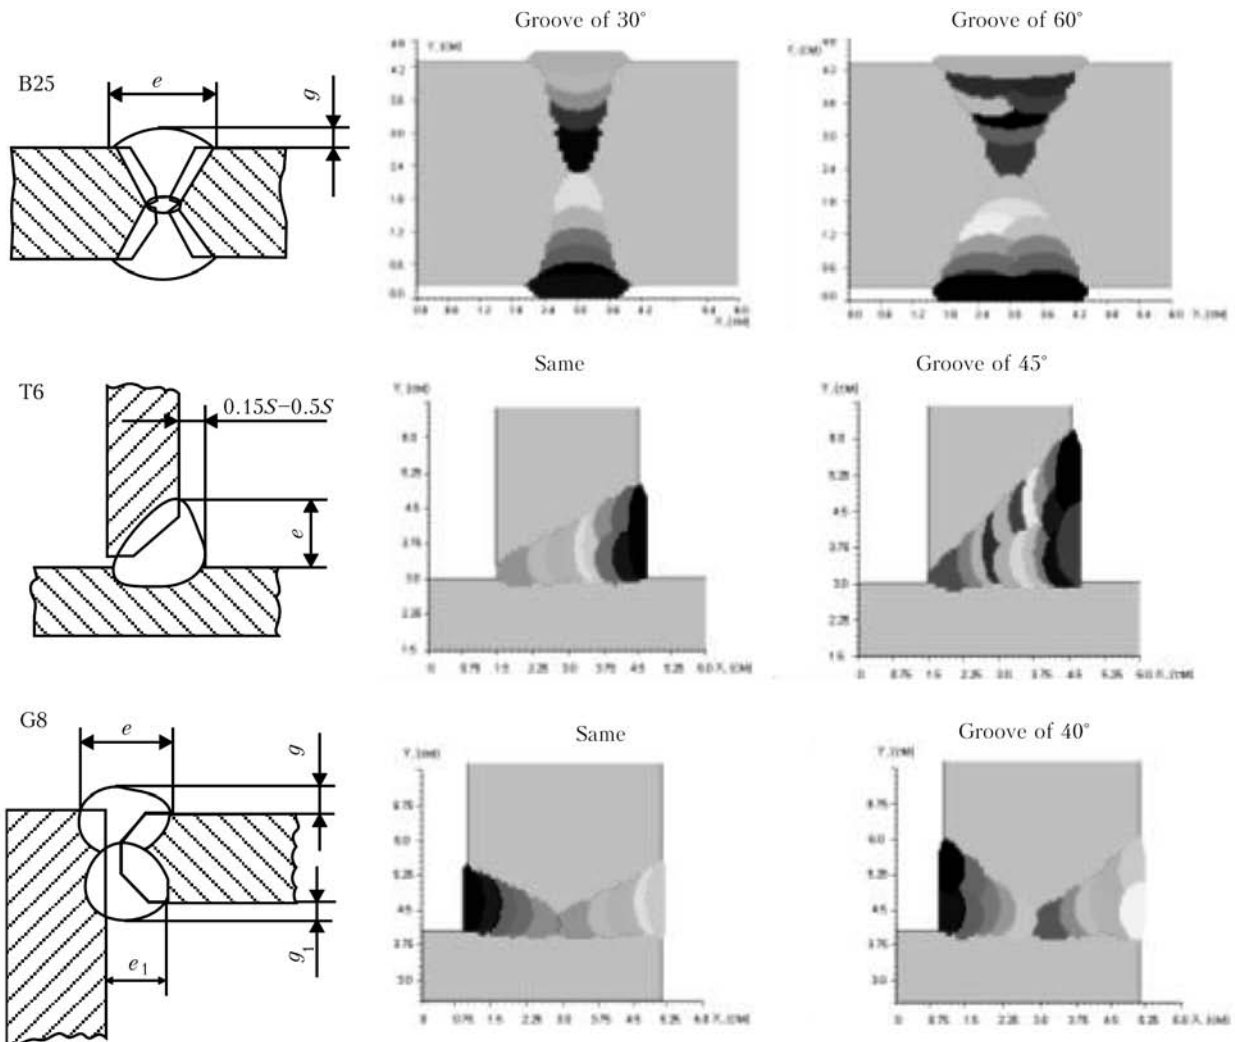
Sketches of welded joints and fusion zones formed in filling the groove
